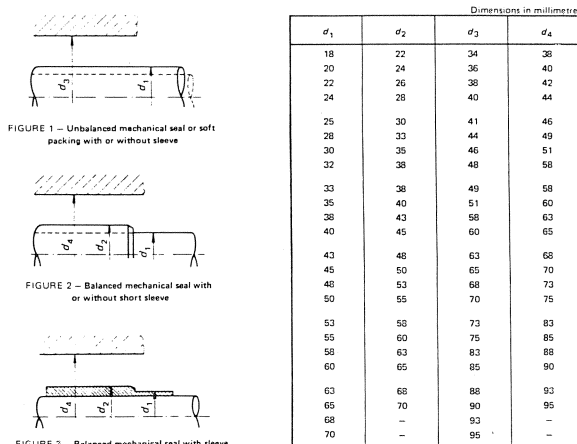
Seal Chamber Dimensions as for ISO 3069.
